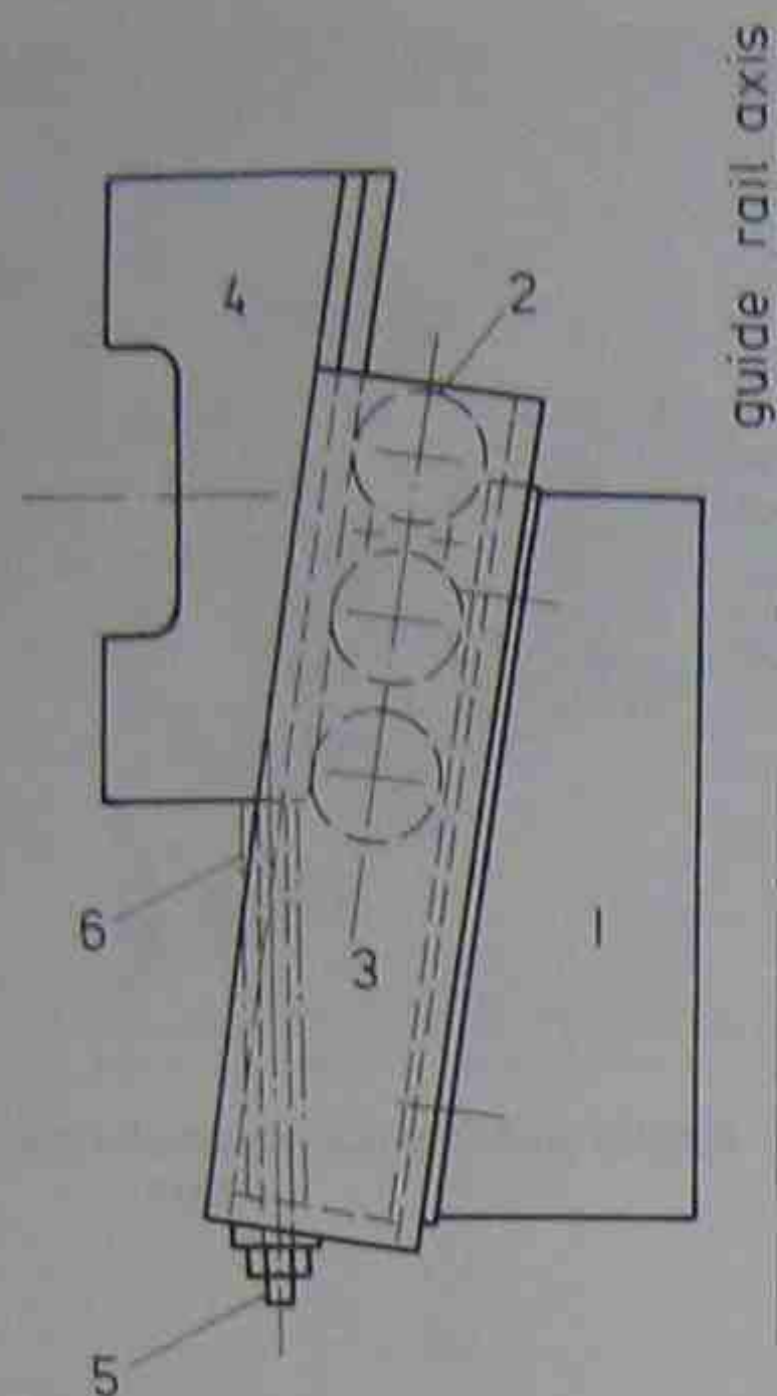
Clamp assembly of flexible guide clamp safety gear. 1. Gibs; 2. Rollers; 3. Cage; 4. Jaw; 5. Screw assembly; 6. Helical spring.
